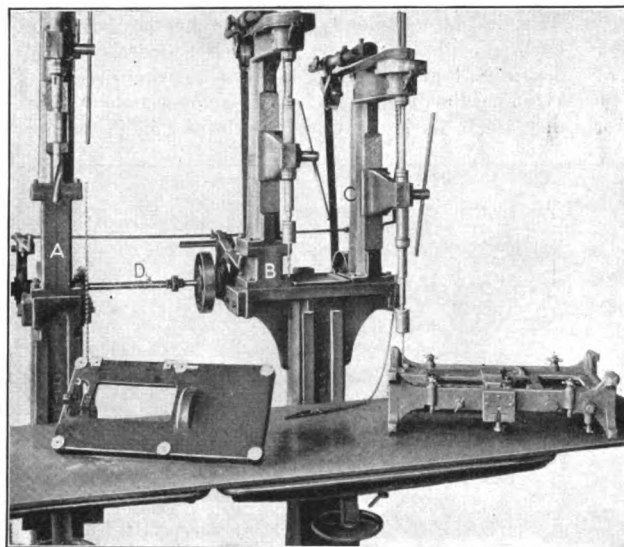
DRILLING MACHINE SPINDLES BUILT UP FOR DIFFERENT HEIGHTS OF WORK
